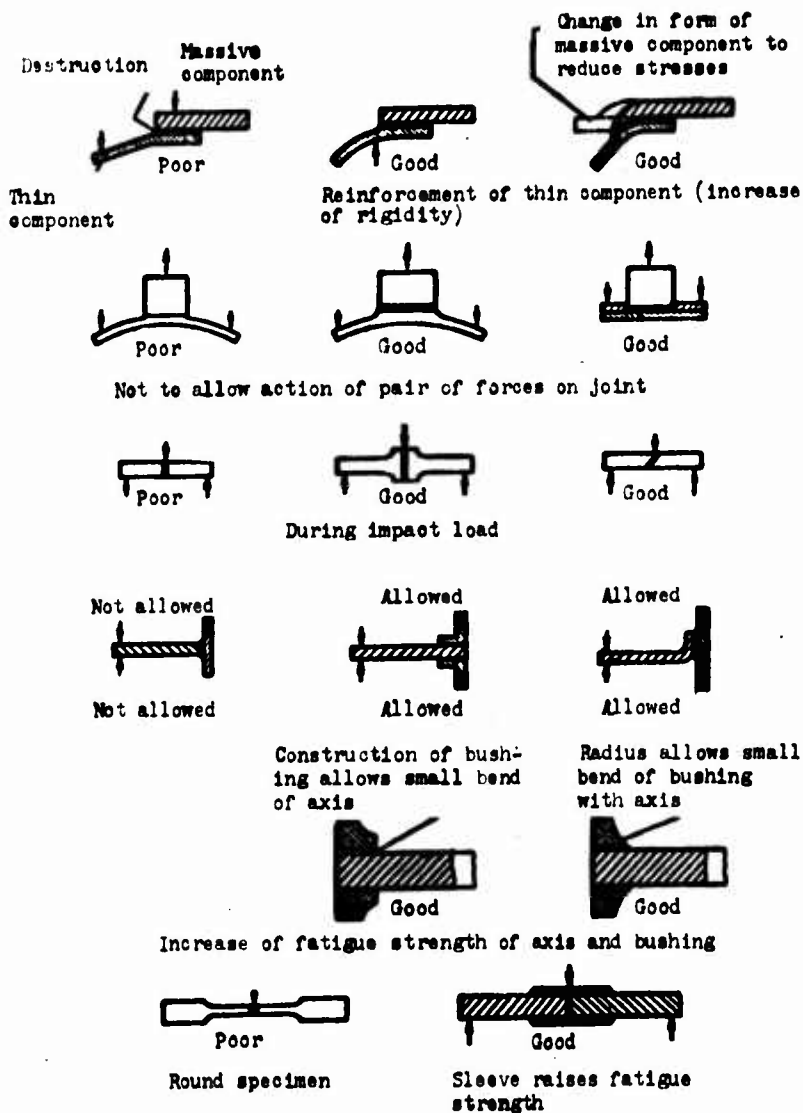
Examples correctly and incorrectly designed soldered joints.
